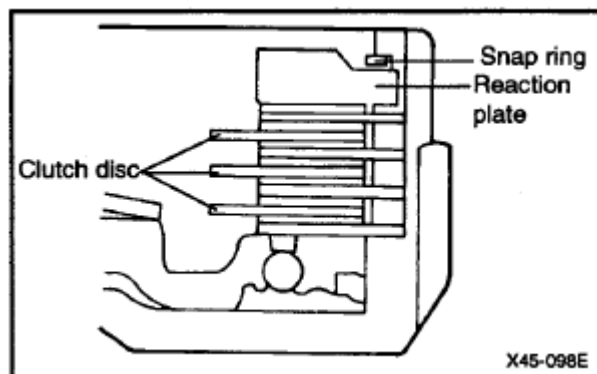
Identifying Clutch Disc & Reaction Plate With Snap Ring
